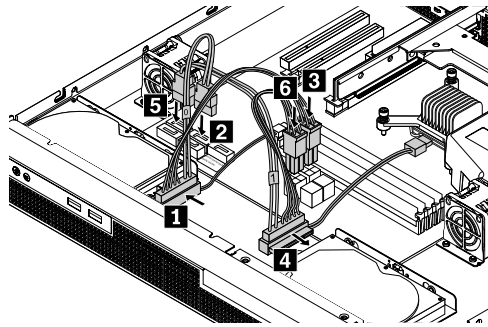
Connecting the 3.5-inch hard disk drives to the system board
